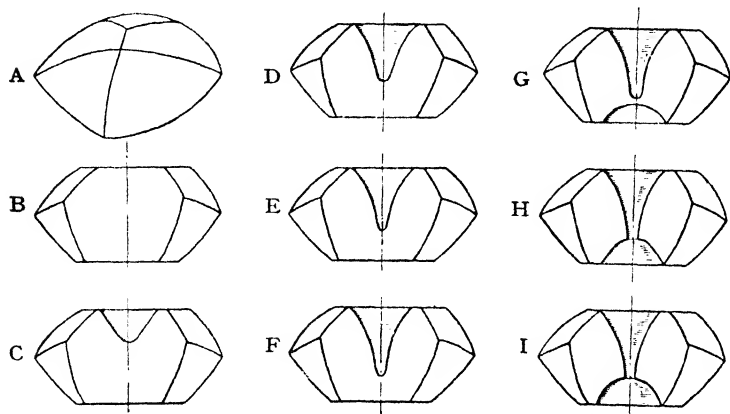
Machining operations of a diamond die (by courtesy of Osram GmbH)
